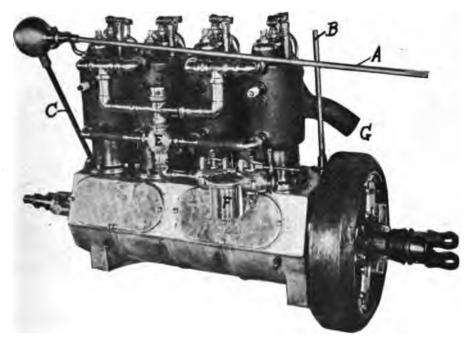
Harrison motor, left side, showing carburetor, piping, air valve on supply pipe, and commutator and governor shaft. A, Governor and commutator shaft. B, Reversing and "Twin Firing" shaft. O, Bevel gear shaft from the cam shaft to drive A. D, "Pure" air valve, turned one way to pass mixture from the carburetor to the cylinders, and turned the other way to close the passage from the carburetor and admit pure air to the cylinders, to obtain the pure air charge to mix with acetylene gas for the starting charge. E, Water jacket around the vertical pipe from the carburetor to cylinders. Cylinder cooling water from the radiator, warm, and fills E, and surrounds a portion of the vertical part of the mixture pipe. F, Carburetor foat chamber. G, Exhaust. H, Carburetor wedge alide, which carries three adjustable incline wedges, coacting with 3-levers to adjust the throttle valve, needle valve and air intake valve simultaneously by sliding the hand-adjusted wedge bar.
